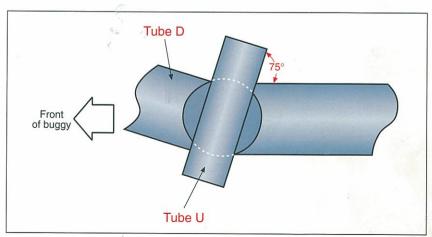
Tubes D and U viewed from the side of the Buggy frame. Tube U should be set as shown when fixed to tube D to give a castor angle of 15 degrees.
